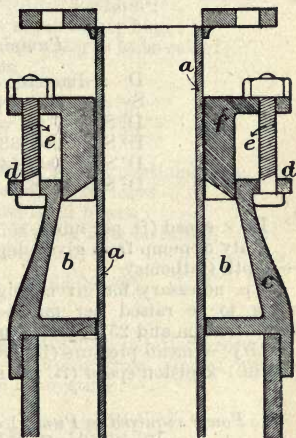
EXPANSION-JOINT FOR SINKING.
